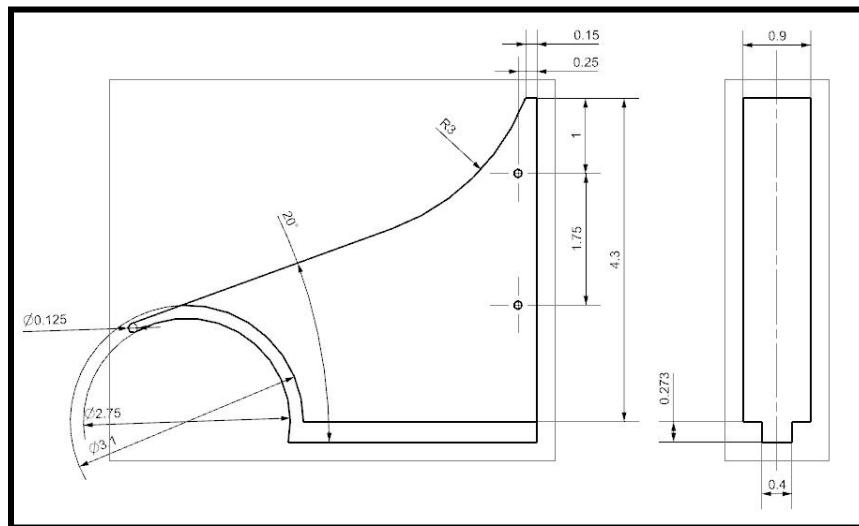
CAD Drawing of Dispenser “Core”
